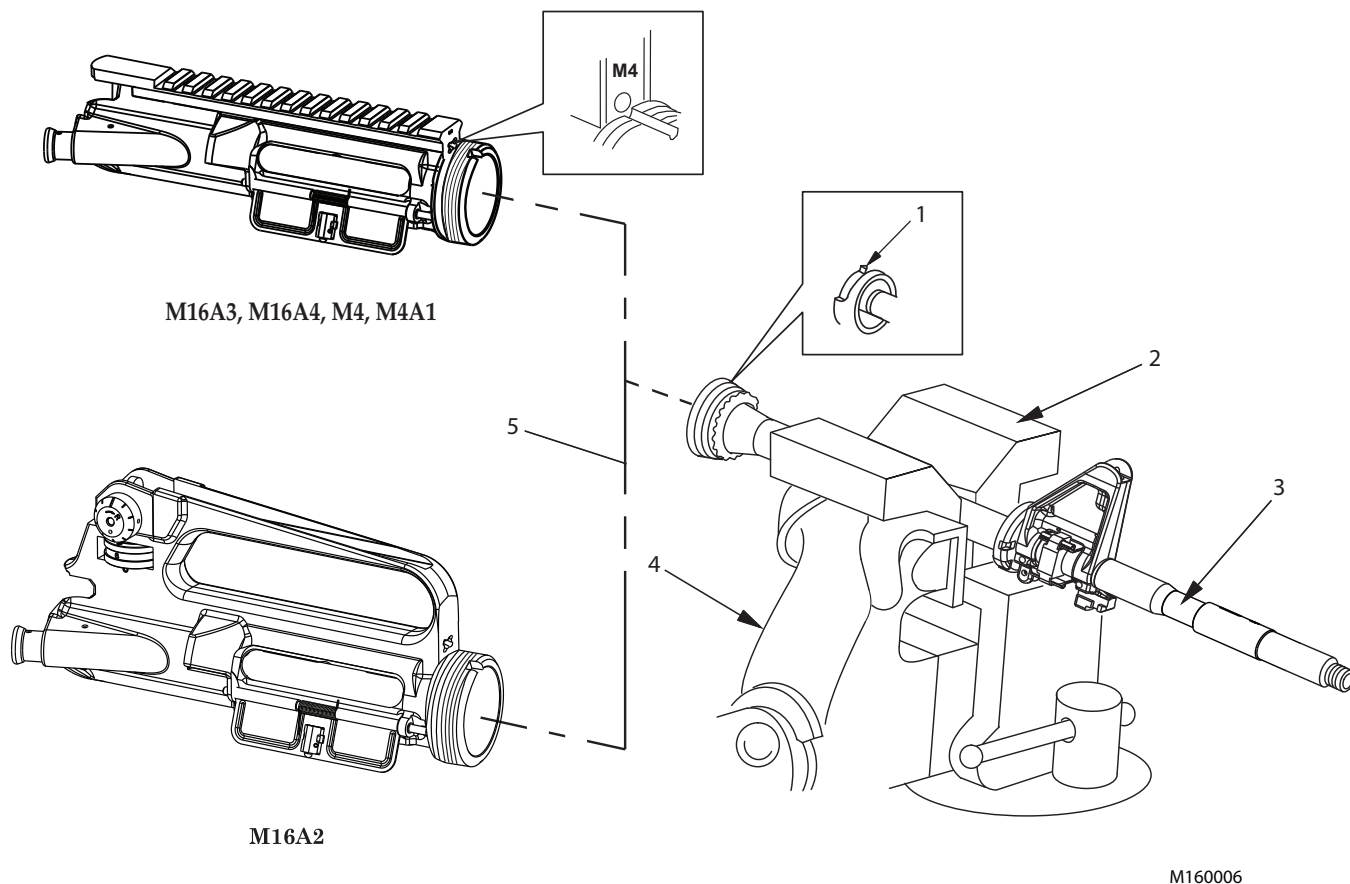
Alignment of Barrel Assembly and Upper Receiver Assembly.
